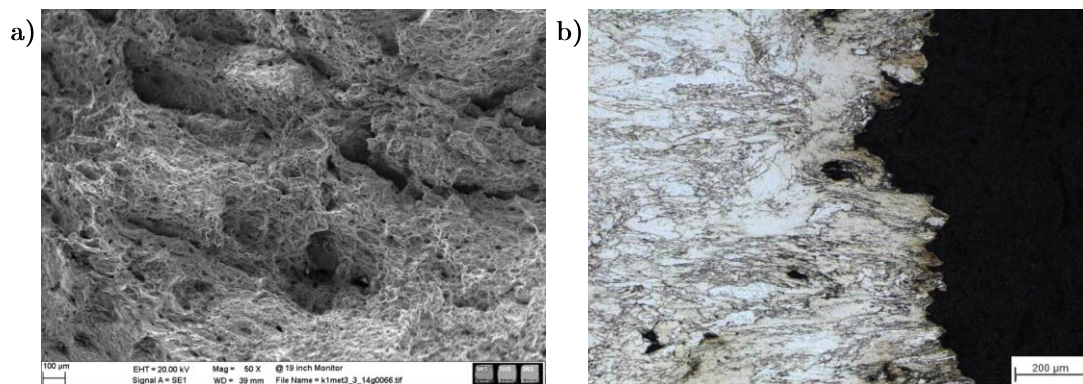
Fracture surface of specimen tested at a) 700°C (RA=66%). b) LOM-image of specimen tested at 650°C (RA=72%).
